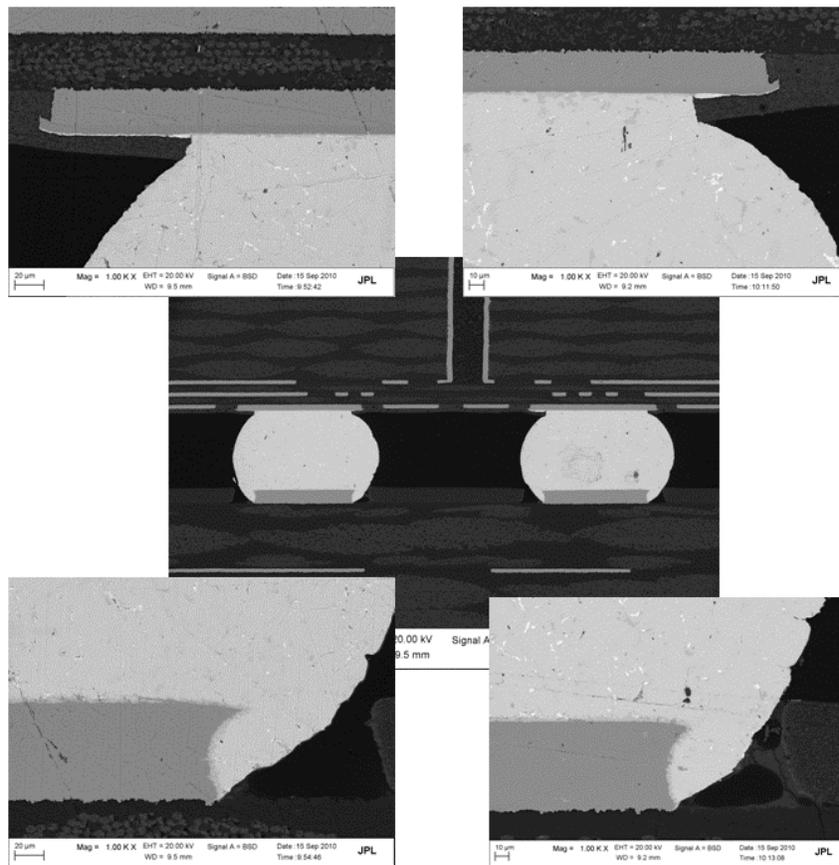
Cross-sectional photomicrographs of FCBGA1704 assembly after thermal cycling showing detailed metallurgical features of flip-chip solder balls at the package/board level.
